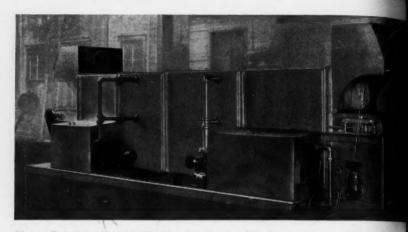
Two-Stage Washing Machine for Cleaning Miscellaneous Parts. This machine man alkali wash with hot water rinse. A wire mesh belt is used to carry small parts as well as larger parts. A machine of this type is of ample size and capacity to do a time washing job on a large variety of parts. Slotted pipe headers are used for nomin.
